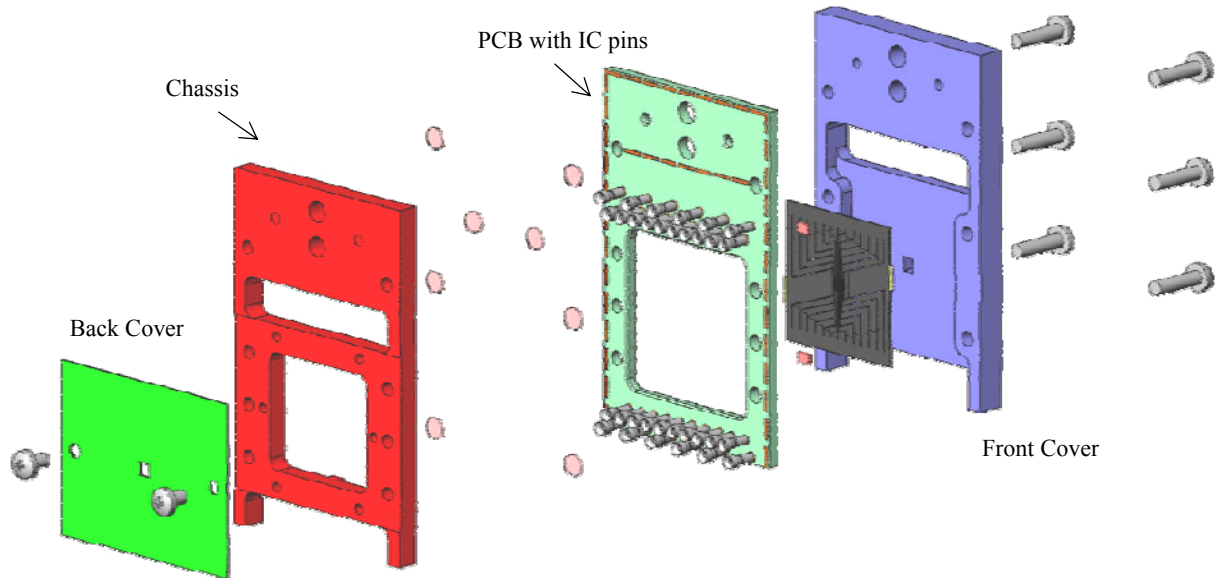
Exploded view of a proposed packaging structure for the Spider MOA.
